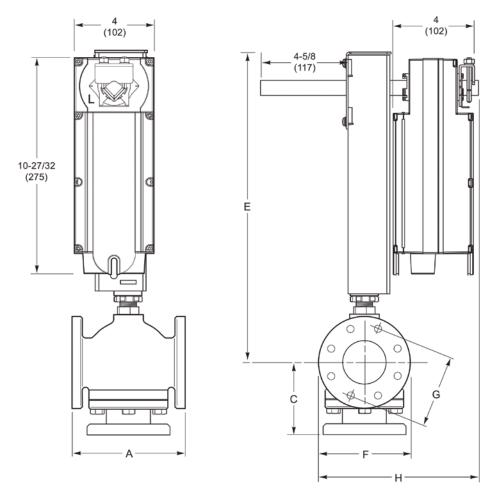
Mx40-717x-2xx with 2-1/2" to 4" 3-Way VB-9313 Flanged Globe Valve With AV-607-1 Linkage. Mx40-717x with 5" and 6" 2-Way VB-9313 Flanged Globe Valve with AV-609-1 linkage
